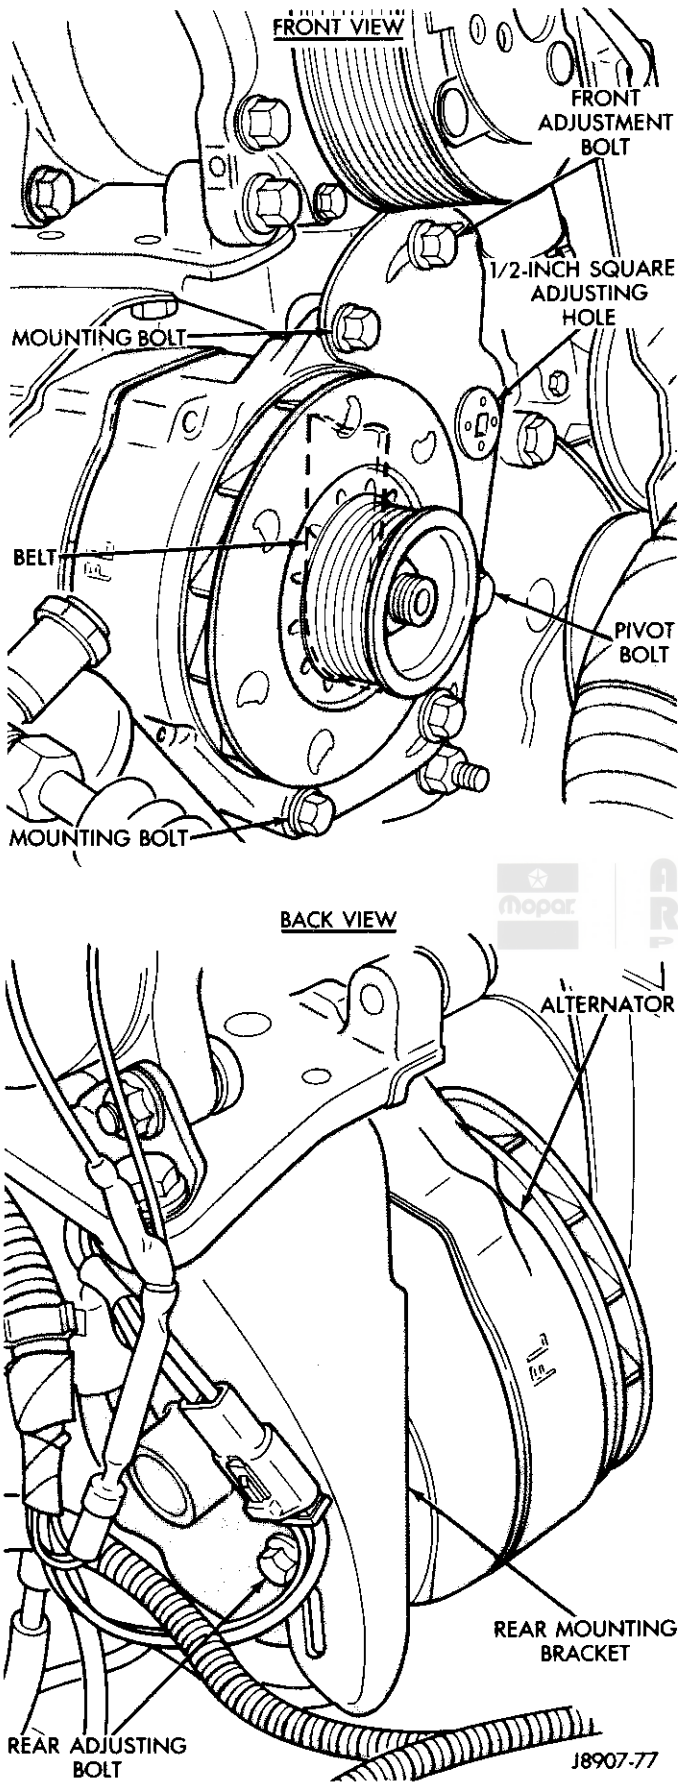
Alternator Removal/Installation — YJ 4.2L
